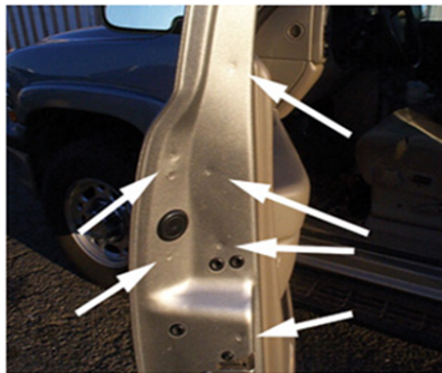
Resistance spot welding in car industry [54].
